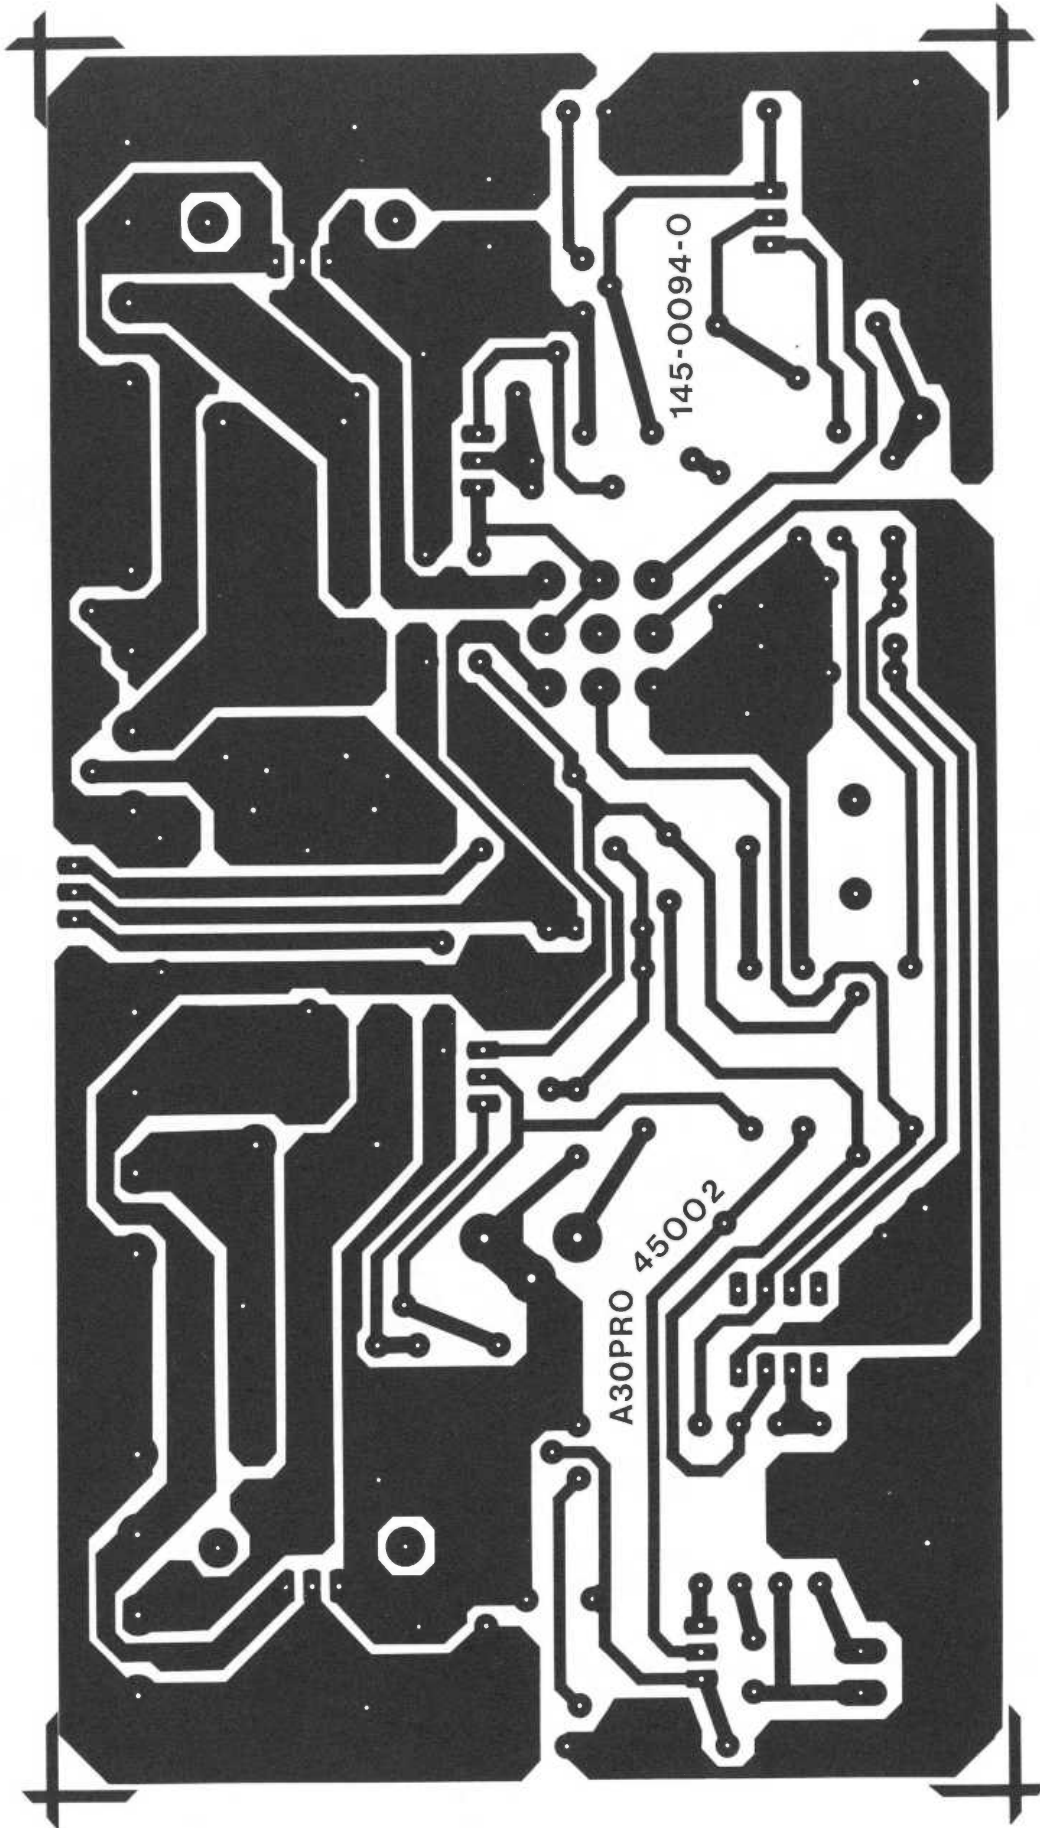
Foil Pattern, A30 Drive PCB
